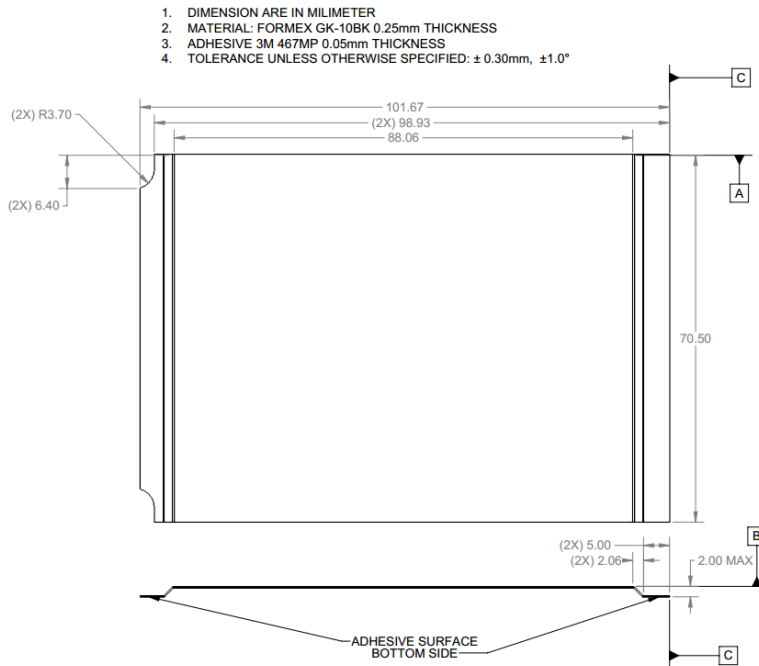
Small Card Bottom Side Insulator (Top and Side View)
